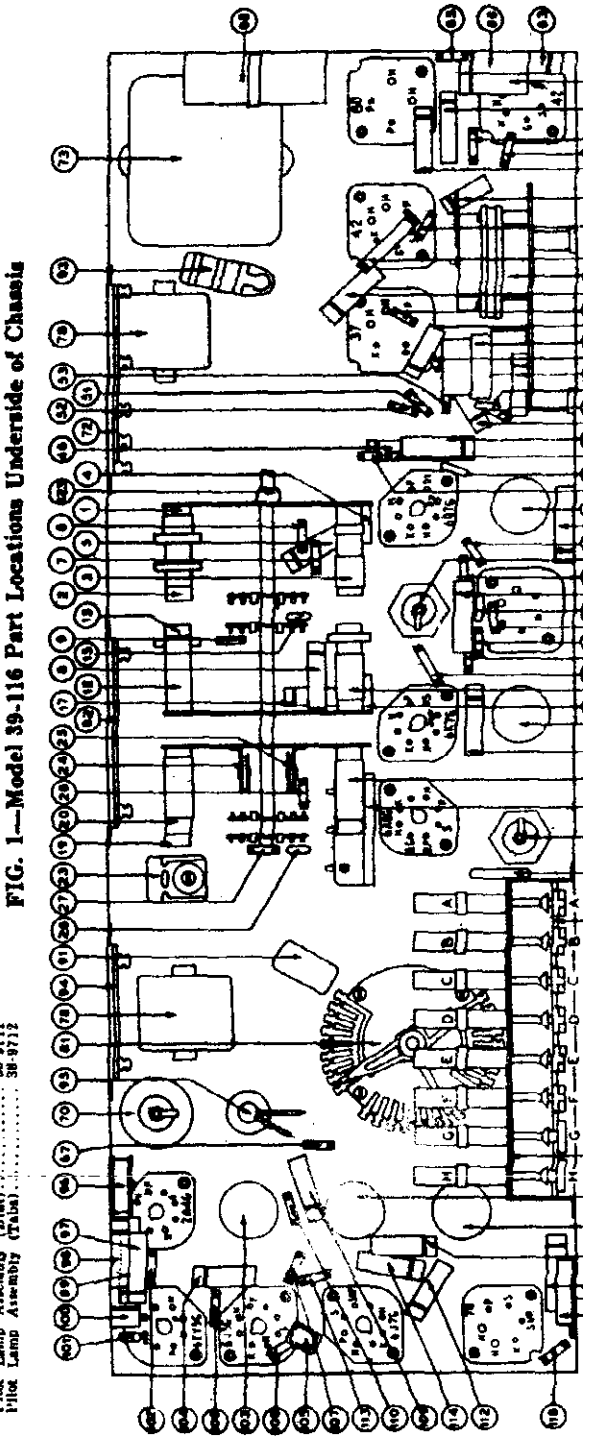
Model 39-116 Part Locations Underside of Chassis
